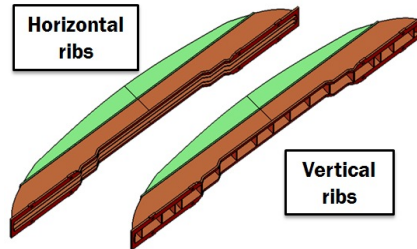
Design alternatives of bumper back-beam according to the rib direction
